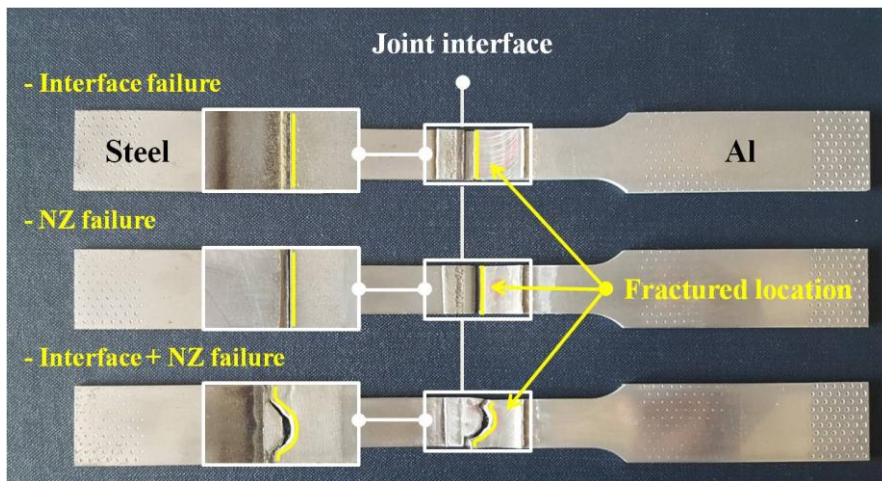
Macrograph of fractured tensile specimen of FS welds
